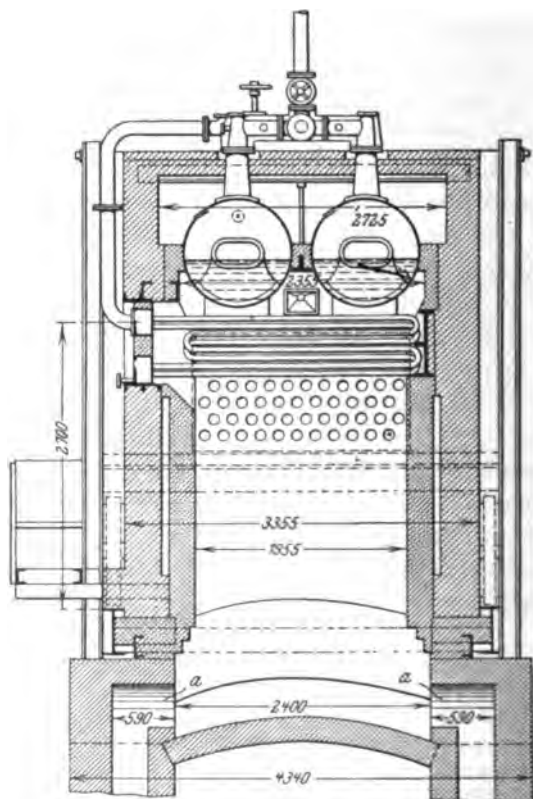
WASTE-HEAT BOILER, DÜRR TYPE, OVER LARGE INGOT-HEATING FURNACE.
